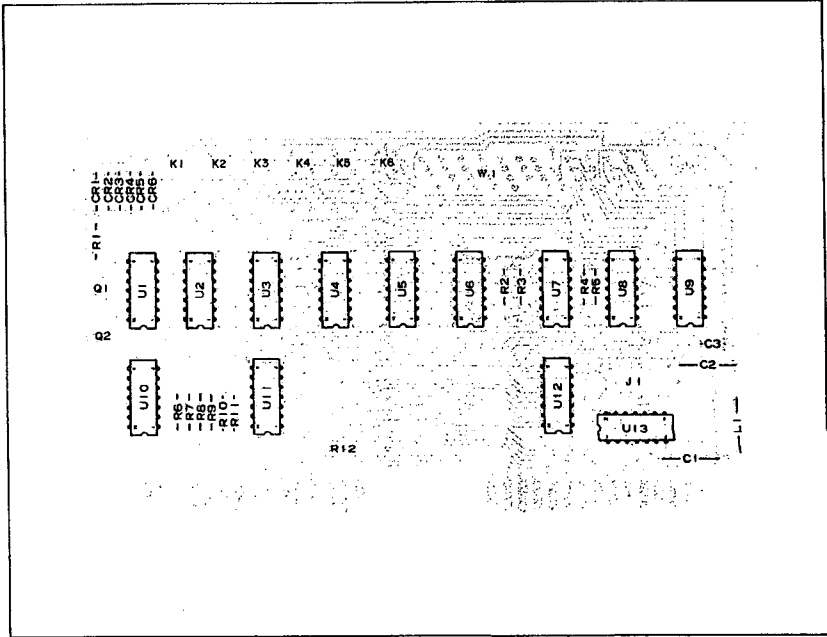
A24 Comparator Control Board Assembly Component Location.
